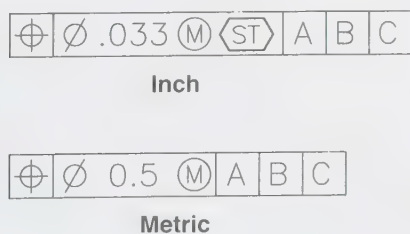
A position tolerance feature control frame may be used for inch or metric tolerance values.
